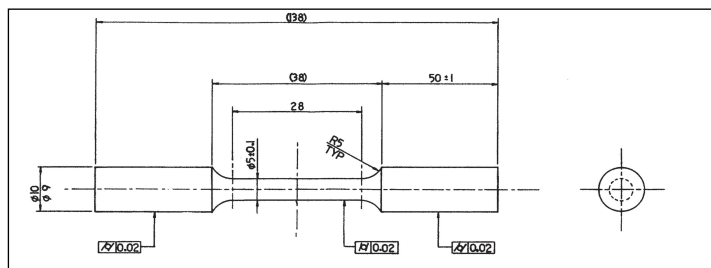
Tensile sample design. Overaged base plate (Plate 1). Dimensions are in mm.
